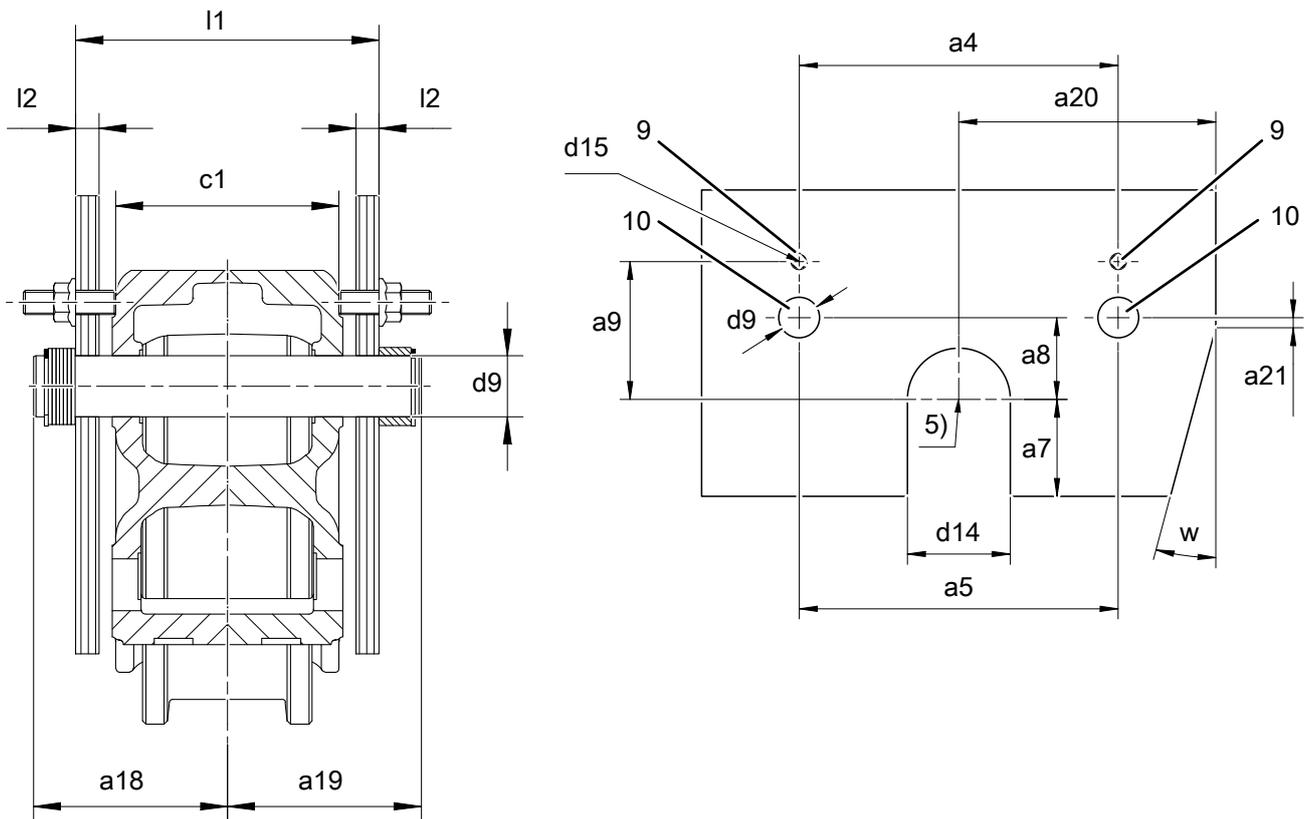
Drilling pattern for pin connection with alignment of the mean track via threaded pin or spacer plates
